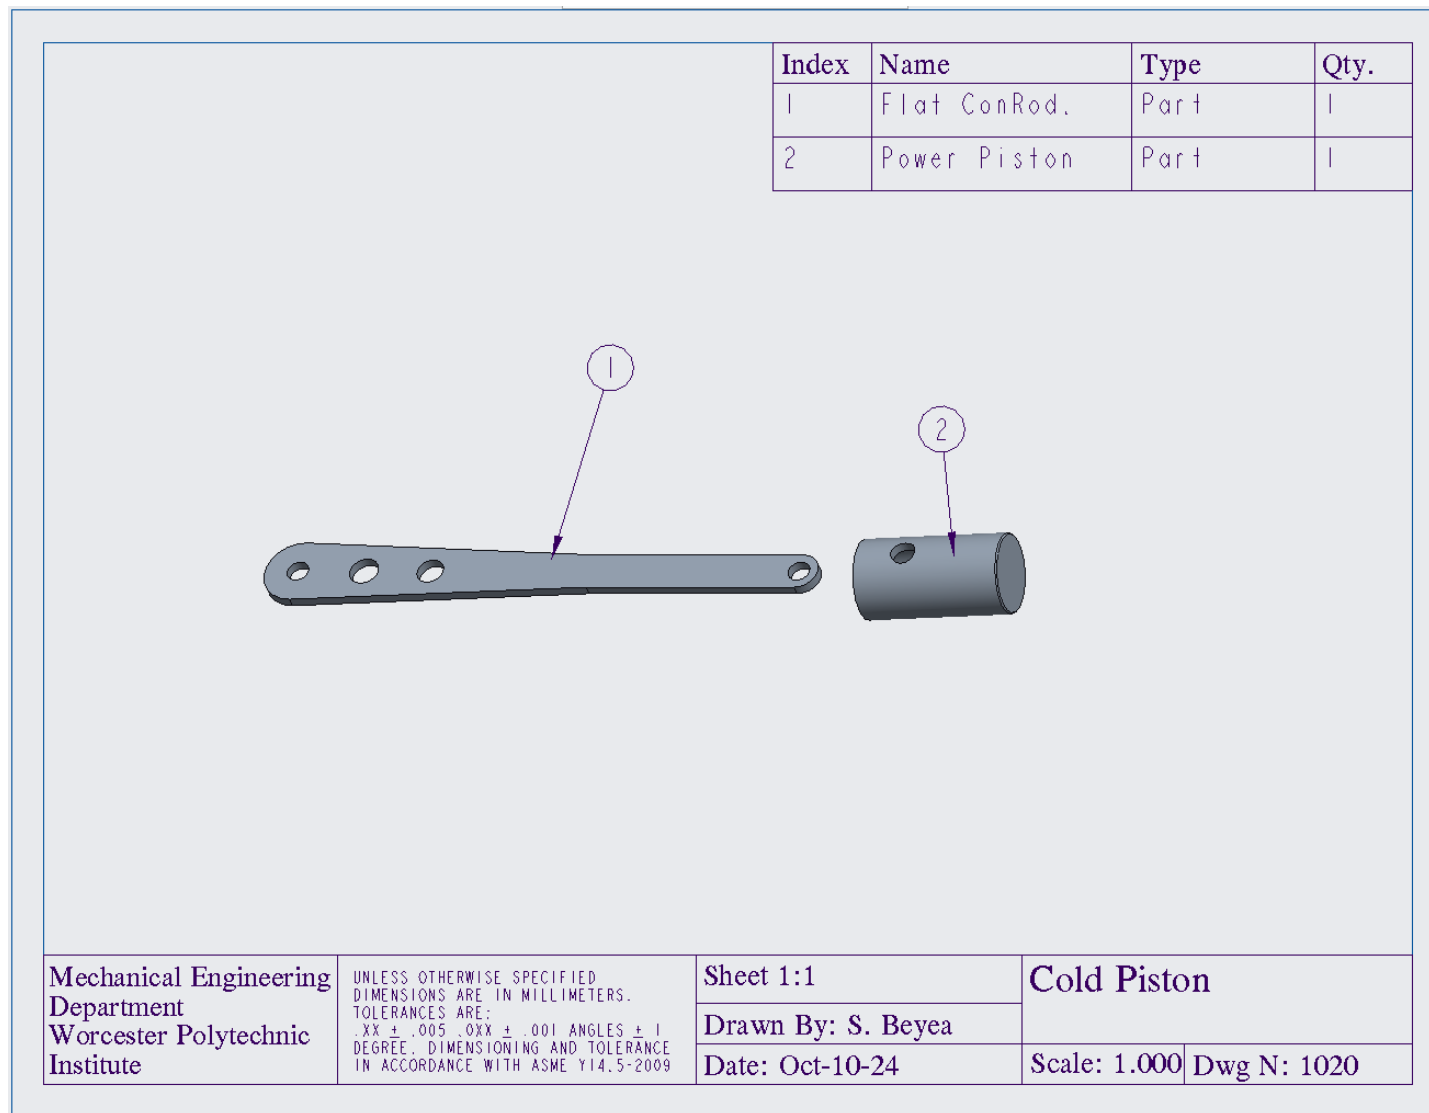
exploded view of the cold piston assembly (with balloons and BOM).
